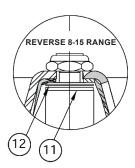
Stem Assembly, Reverse 8 to 15 psi / 0.55 to 1.03 bar Spring Range Only
